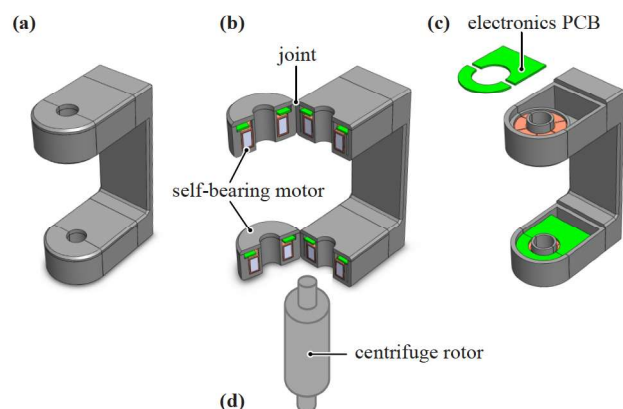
shows a conceptual illustration thereof. Two self-bearing motors (SBMs), forming a double self-bearing motor, drive the UCF rotor and keep it contact-less in place. As a special feature, a joint between the self-bearing motor modules allows access to the rotor and simple insertion or removal thereof.
